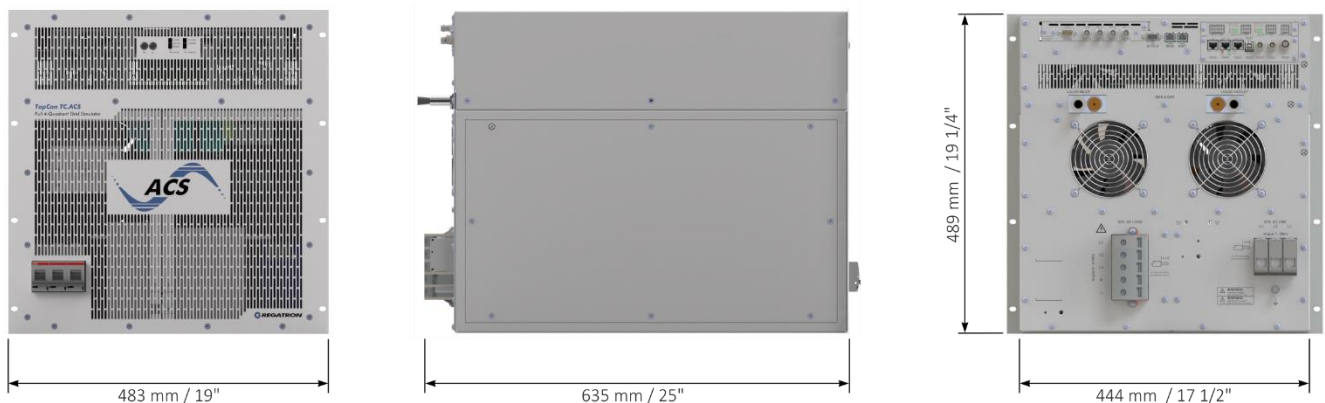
Front, right hand side and rear view. 19-inch module with 11 units in height.
